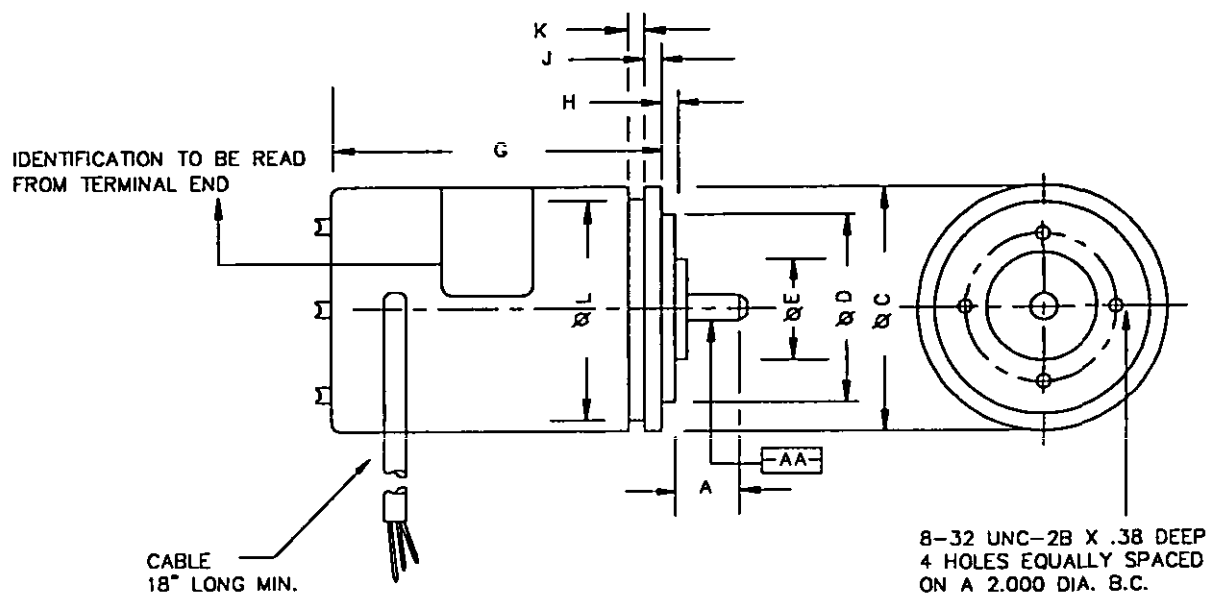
Outline drawing for size 31 shaft angle to digital encoders (synchro mount).
